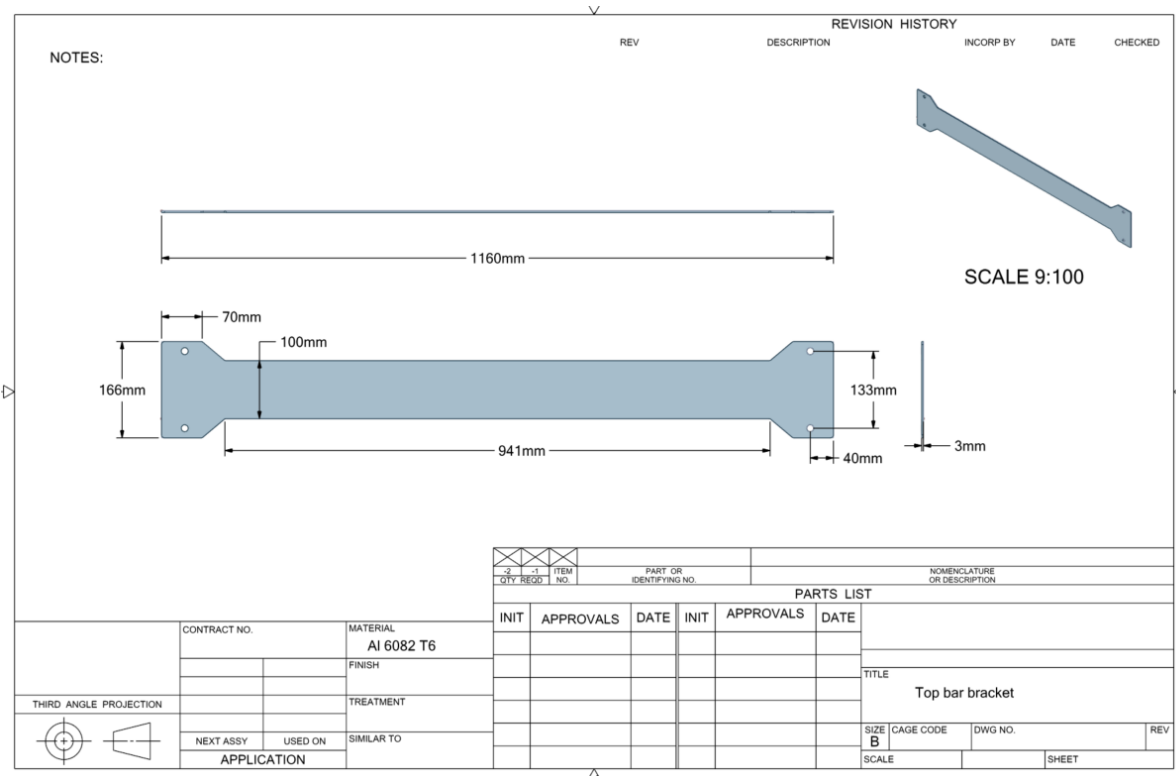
Aluminium 6082 T6 Top Bar Bracket Drawing
